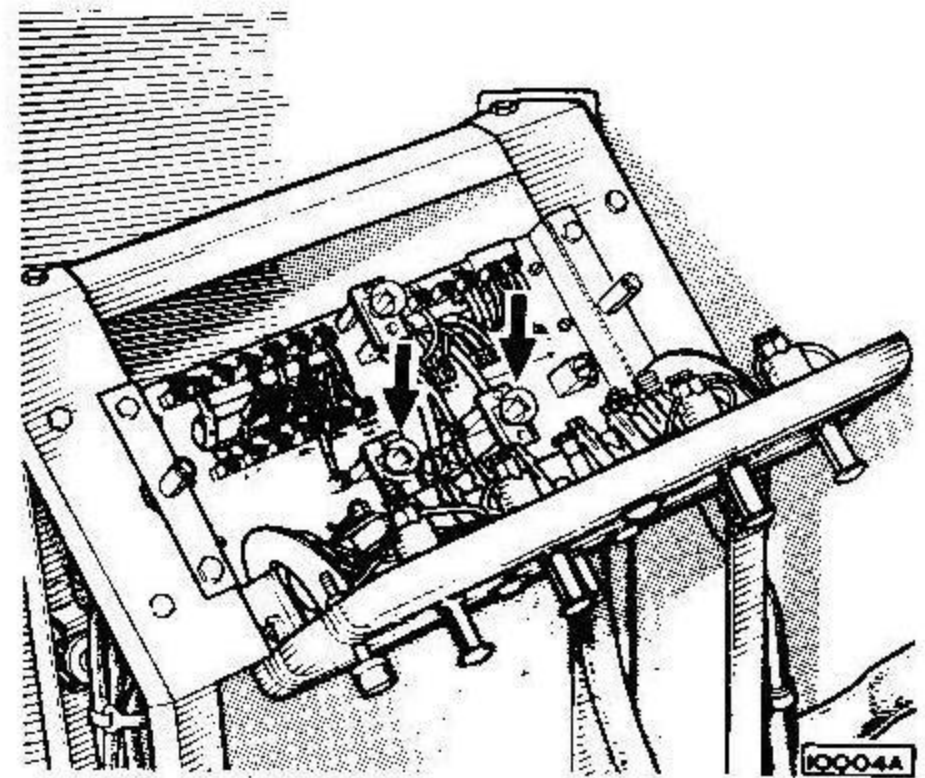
The panel lowered to gain access to the monitoring lamps (shown in chassis form)
